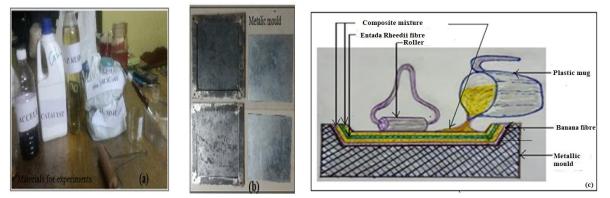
(a) Experimental set-up, (b) Metallic mould and (c) Schematic of fibre layer fabrication set-up (Hand lay-up method)
